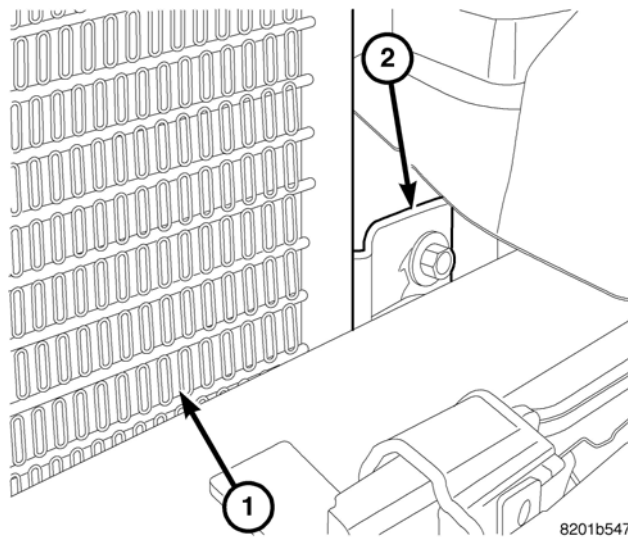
TRANSMISSION COOLER INSTALLED - LEFT SIDE
